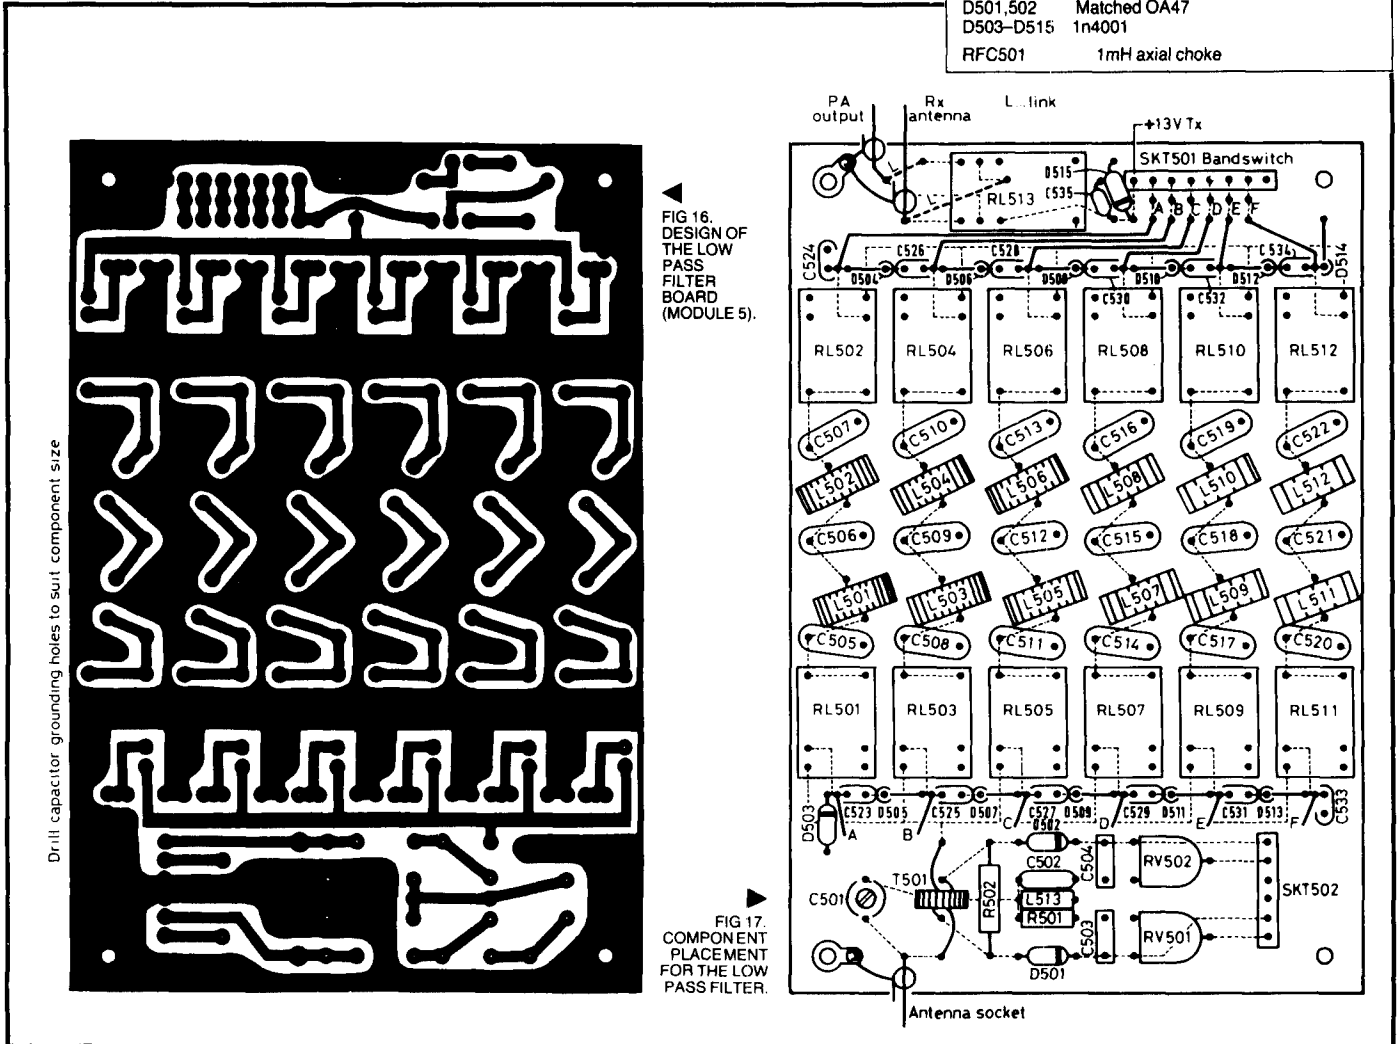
DESIGN OF THE LOW PASS FILTER BOARD (MODULE 5).
